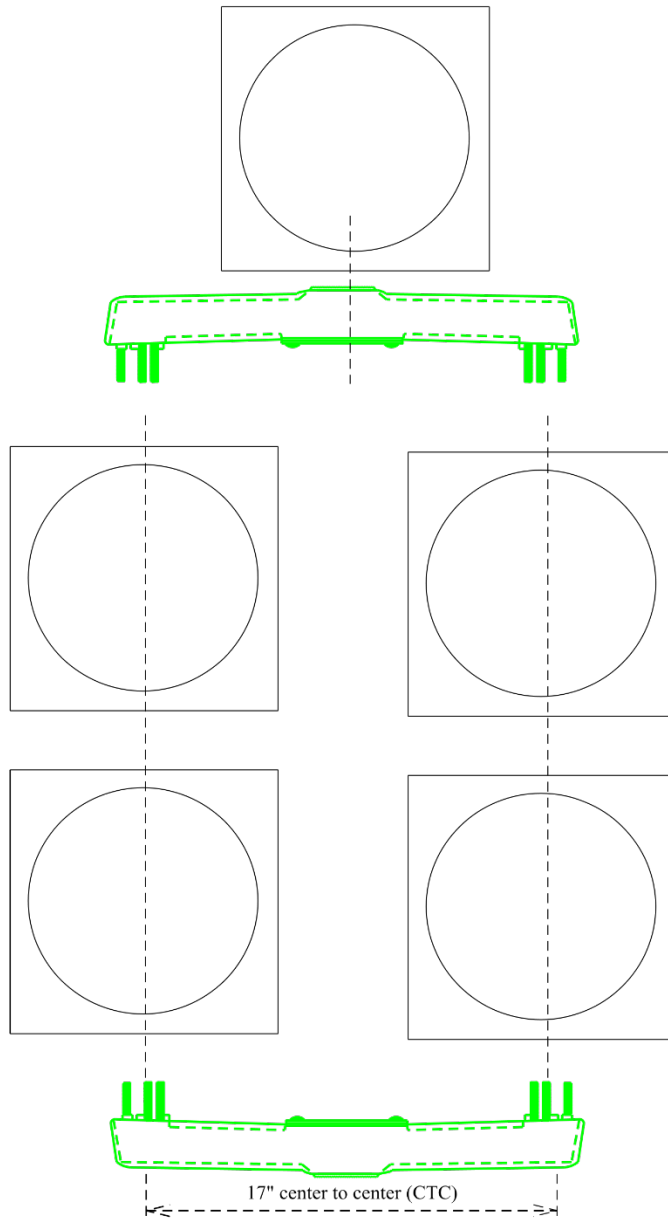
4 SECTION CLUSTER ASSEMBLY
